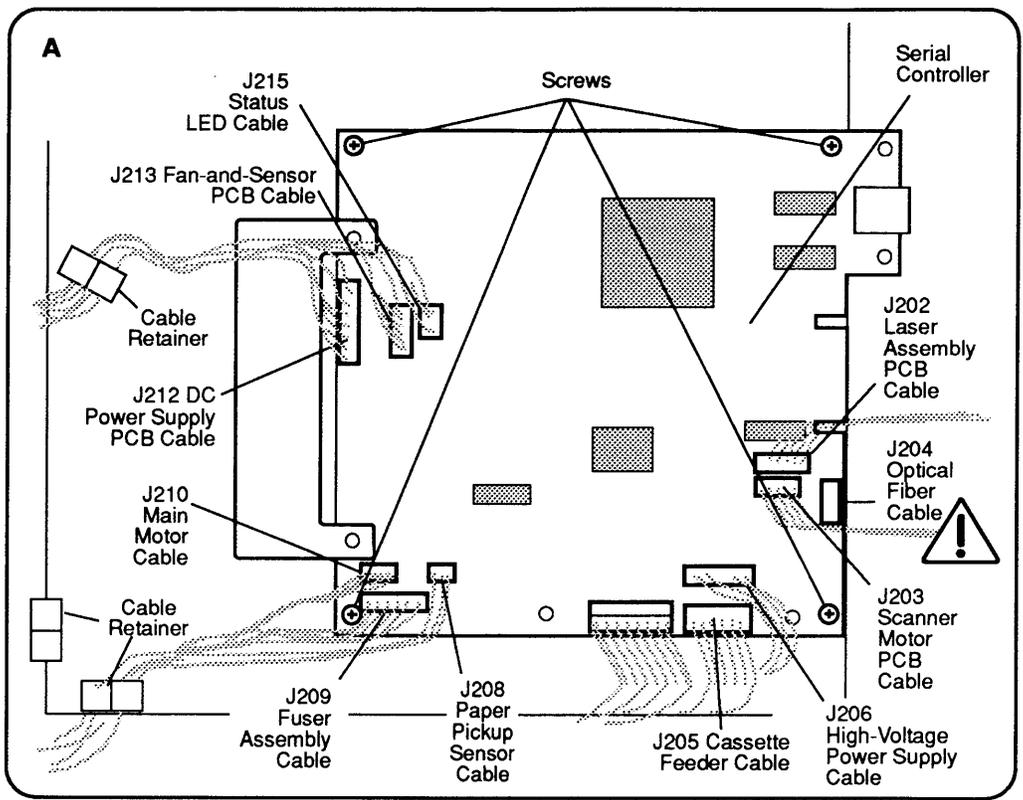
PCB Mounting Plate (LaserWriter LS/L)
